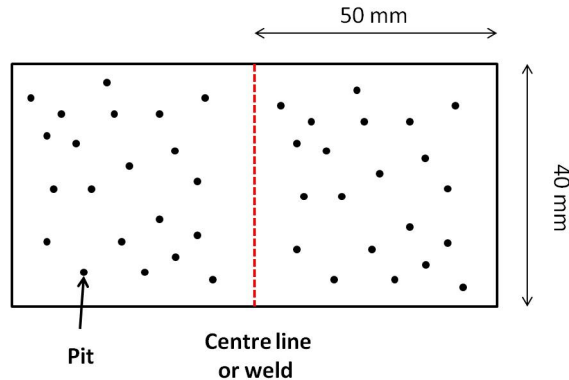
Figure illustrating sections measuring 50x40 mm where pit analysis were done. Measurements were taken in the extrusion plane at one side of the centre line/ weld only.
